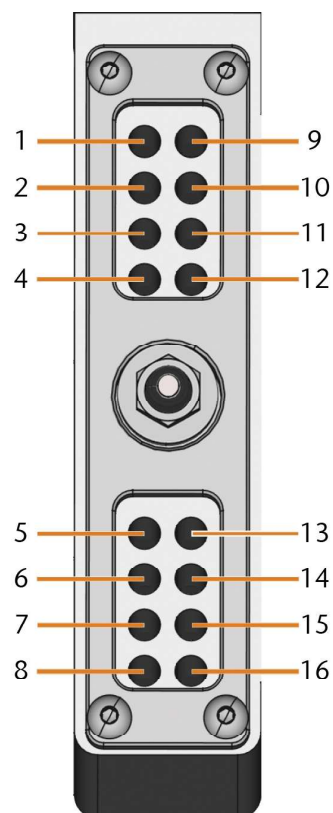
INSERTING TOOLS INTO THE TOOL POSITIONS
